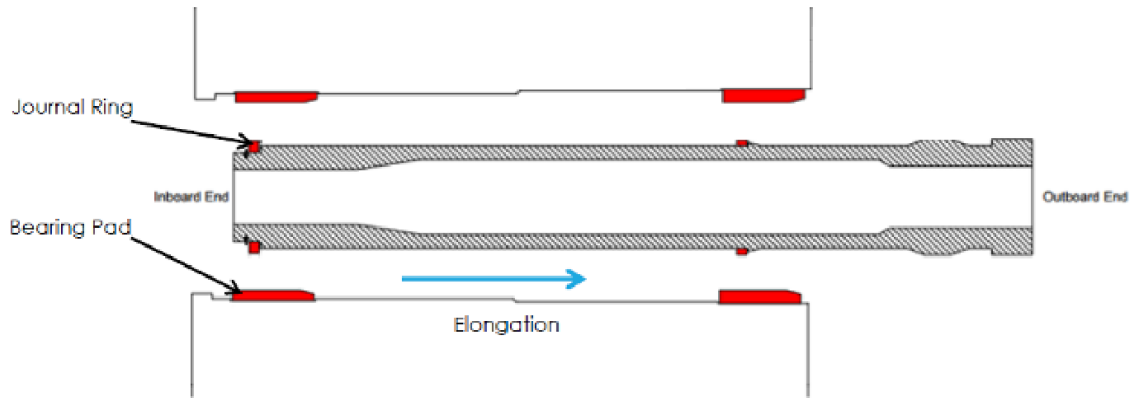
FUEL CHANNEL ELONGATION BEARING AND JOURNAL RING
